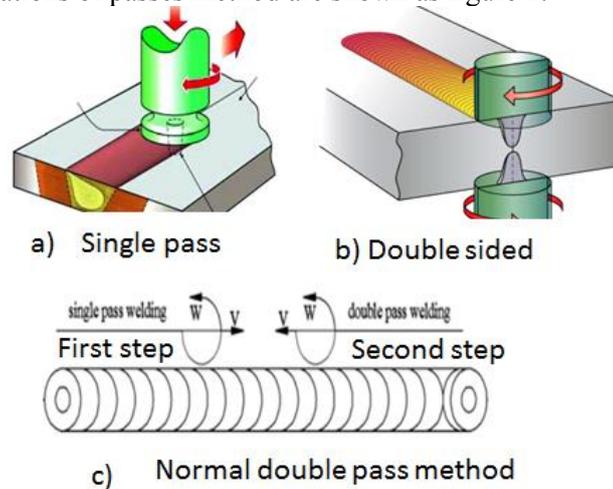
Welding passes method. a) Single pass, b) Double sided pass method and c) Normal double pass method [9, 10].
